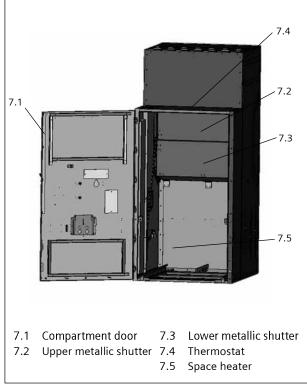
View into Circuit Breaker panel after removing the drawout truck
